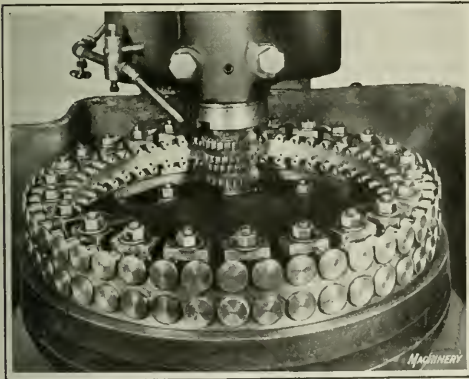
An Operation on Valve Lifters, the Cutter-spindle being located within the Work Fixture
